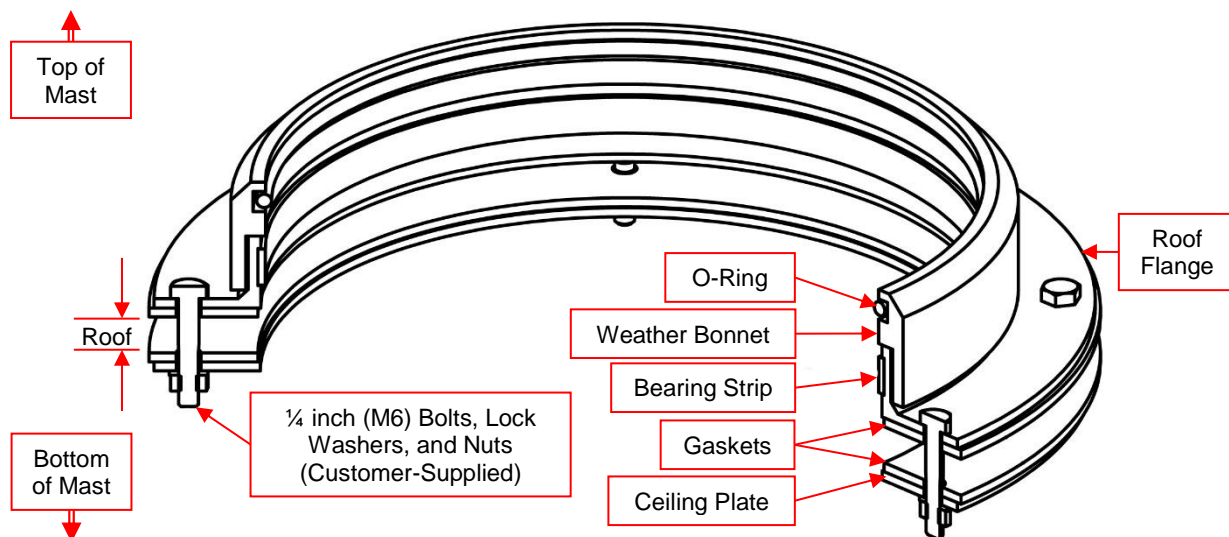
Internal Mounting Kit for Standard-Duty and Heavy-Duty Masts (P/N: 905733 Shown)
